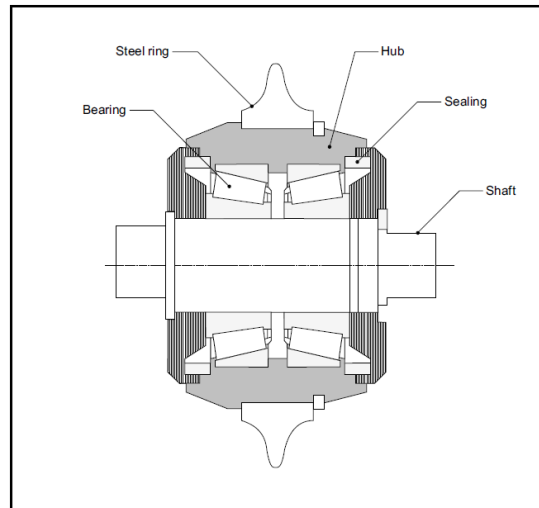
Single disc cutter with steel ring (Bruland, 1998)
